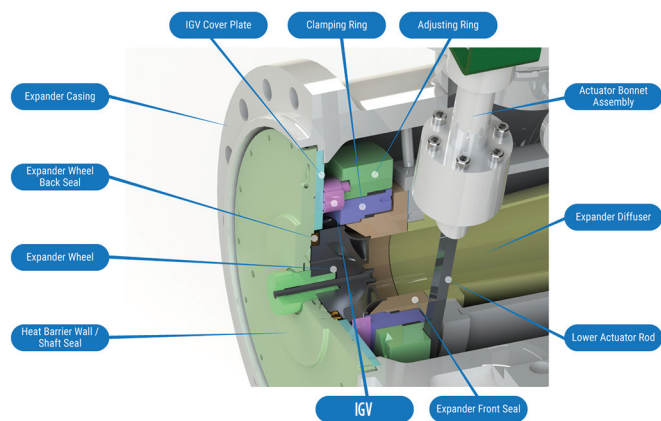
Variable inlet guide vane assembly. Image courtesy of L.A. Turbine.
